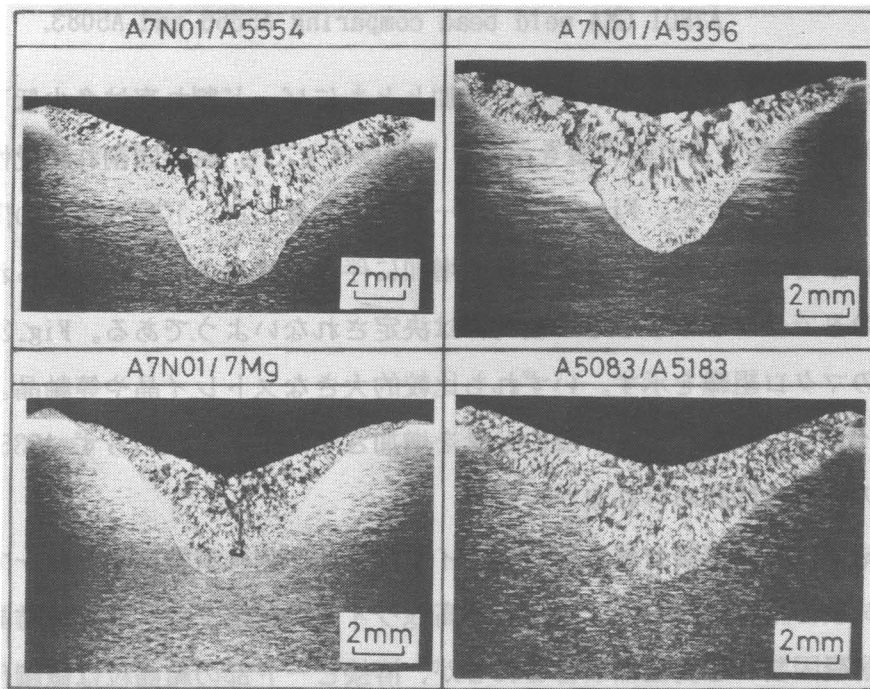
Crosssectional macrostructures of A7N01 GMA weld crater with different wires comparing A5083.
